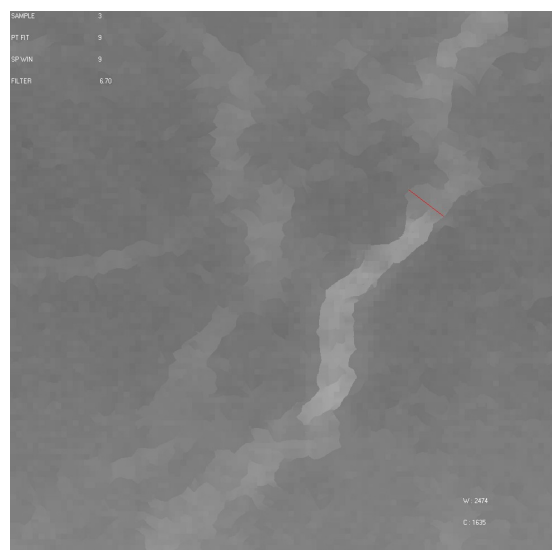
9x ROI on weld-cracks 'after' enhancement.
